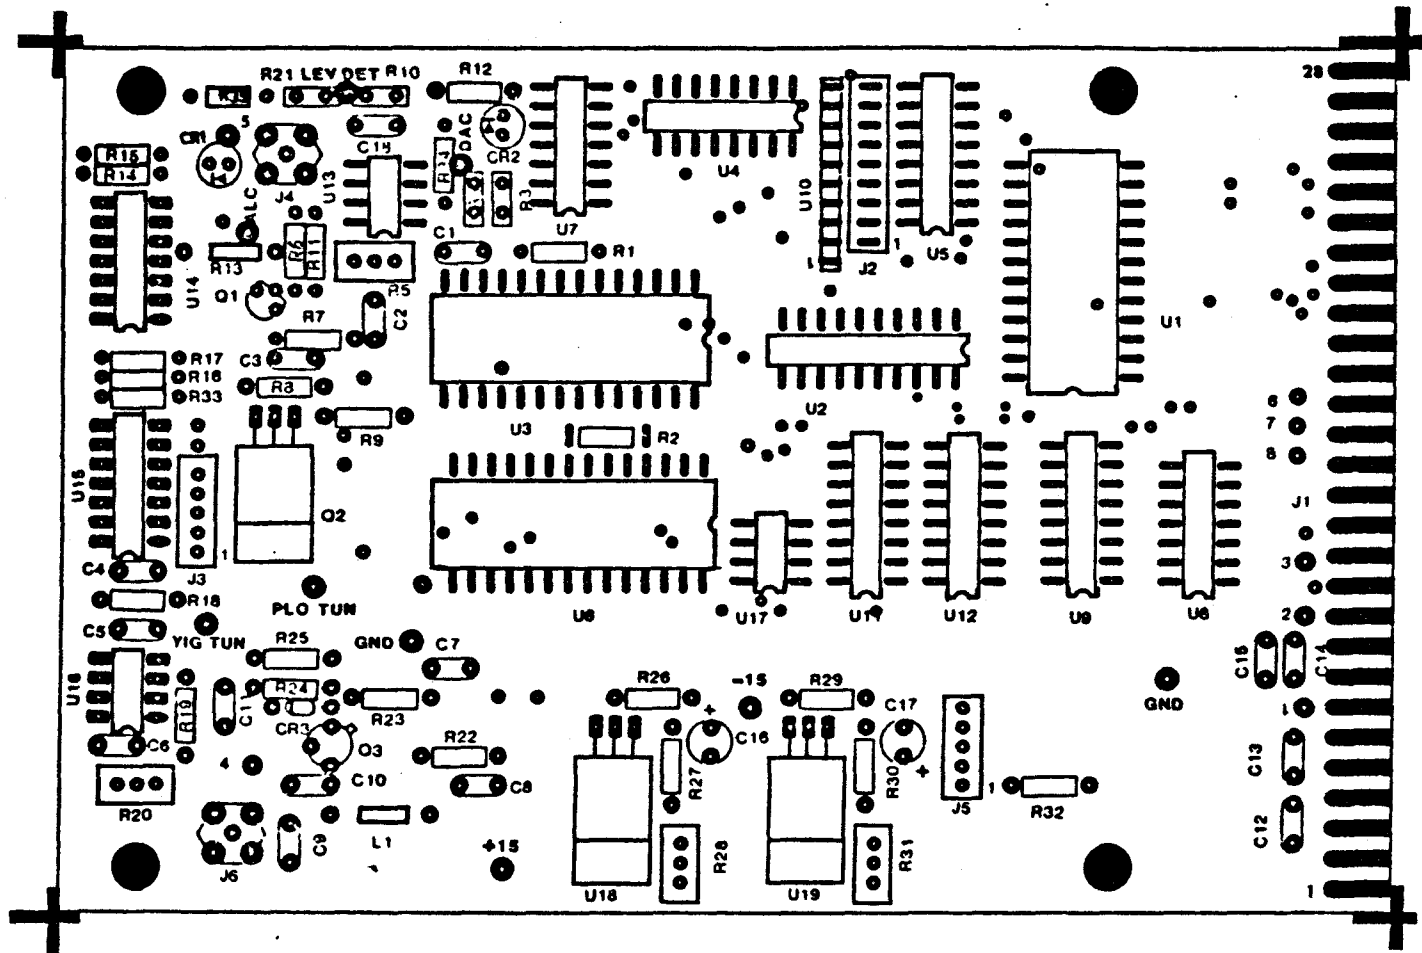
AS210-06 Control Circuit Card (A2) Assembly Diagram
